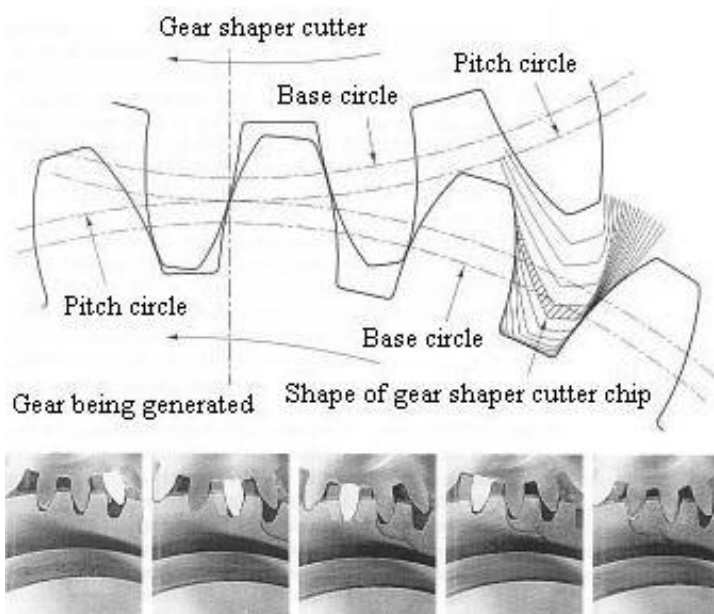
Generating action of a gear-shaper cutter; (Bottom) series of photographs showing various stages in generating one tooth in a gear by means of a gear-shaper cutter, action taking place from right to left. One tooth of the cutter was painted white.
